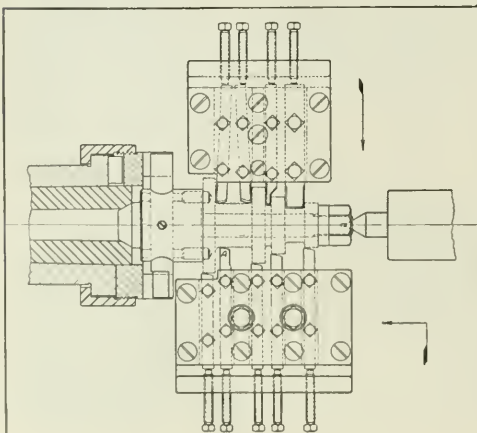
Equipment for turning and forming the Cluster Gear shown in Fig. 1
